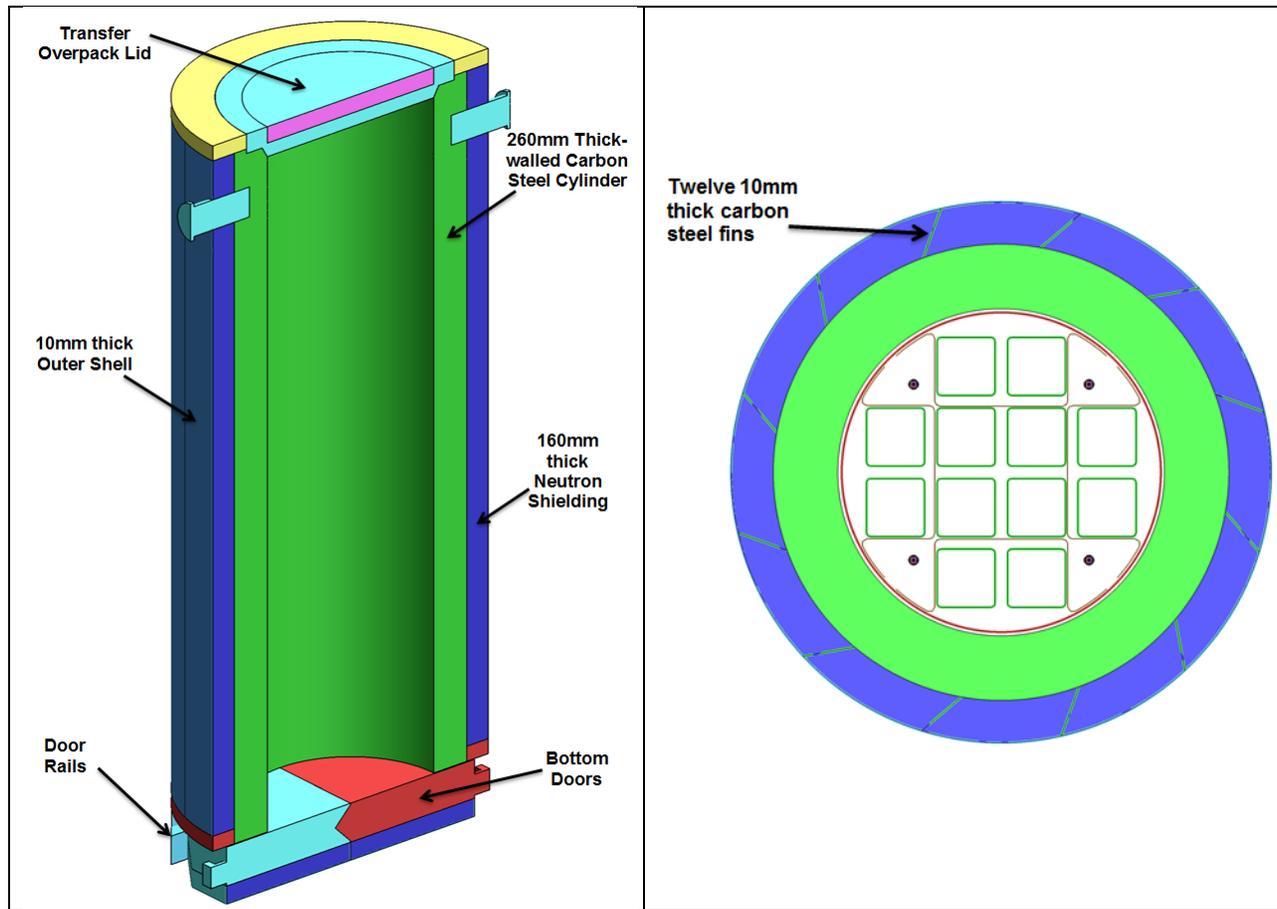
Vertical (left) and horizontal (right) section through the Transfer Overpack
